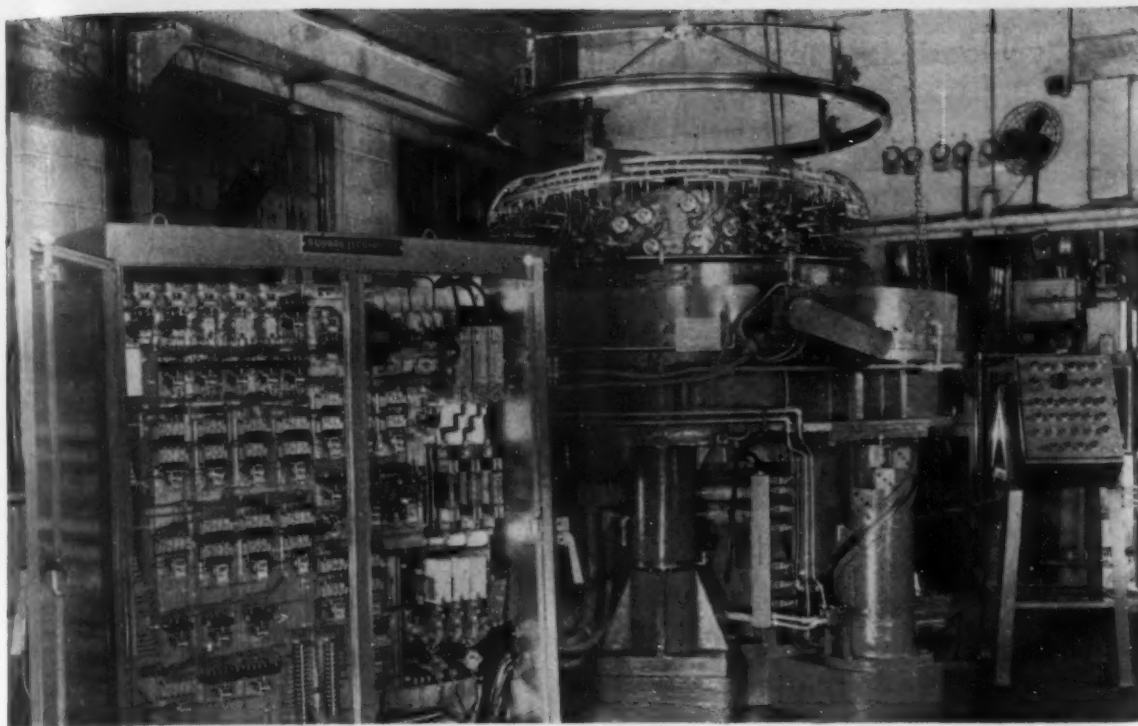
Control panel and the new automatic drilling and tapping machine for tank turret rings recently placed in operation at Detroit Tank Arsenal. In the photograph, a race ring is being lowered into position for machining.
